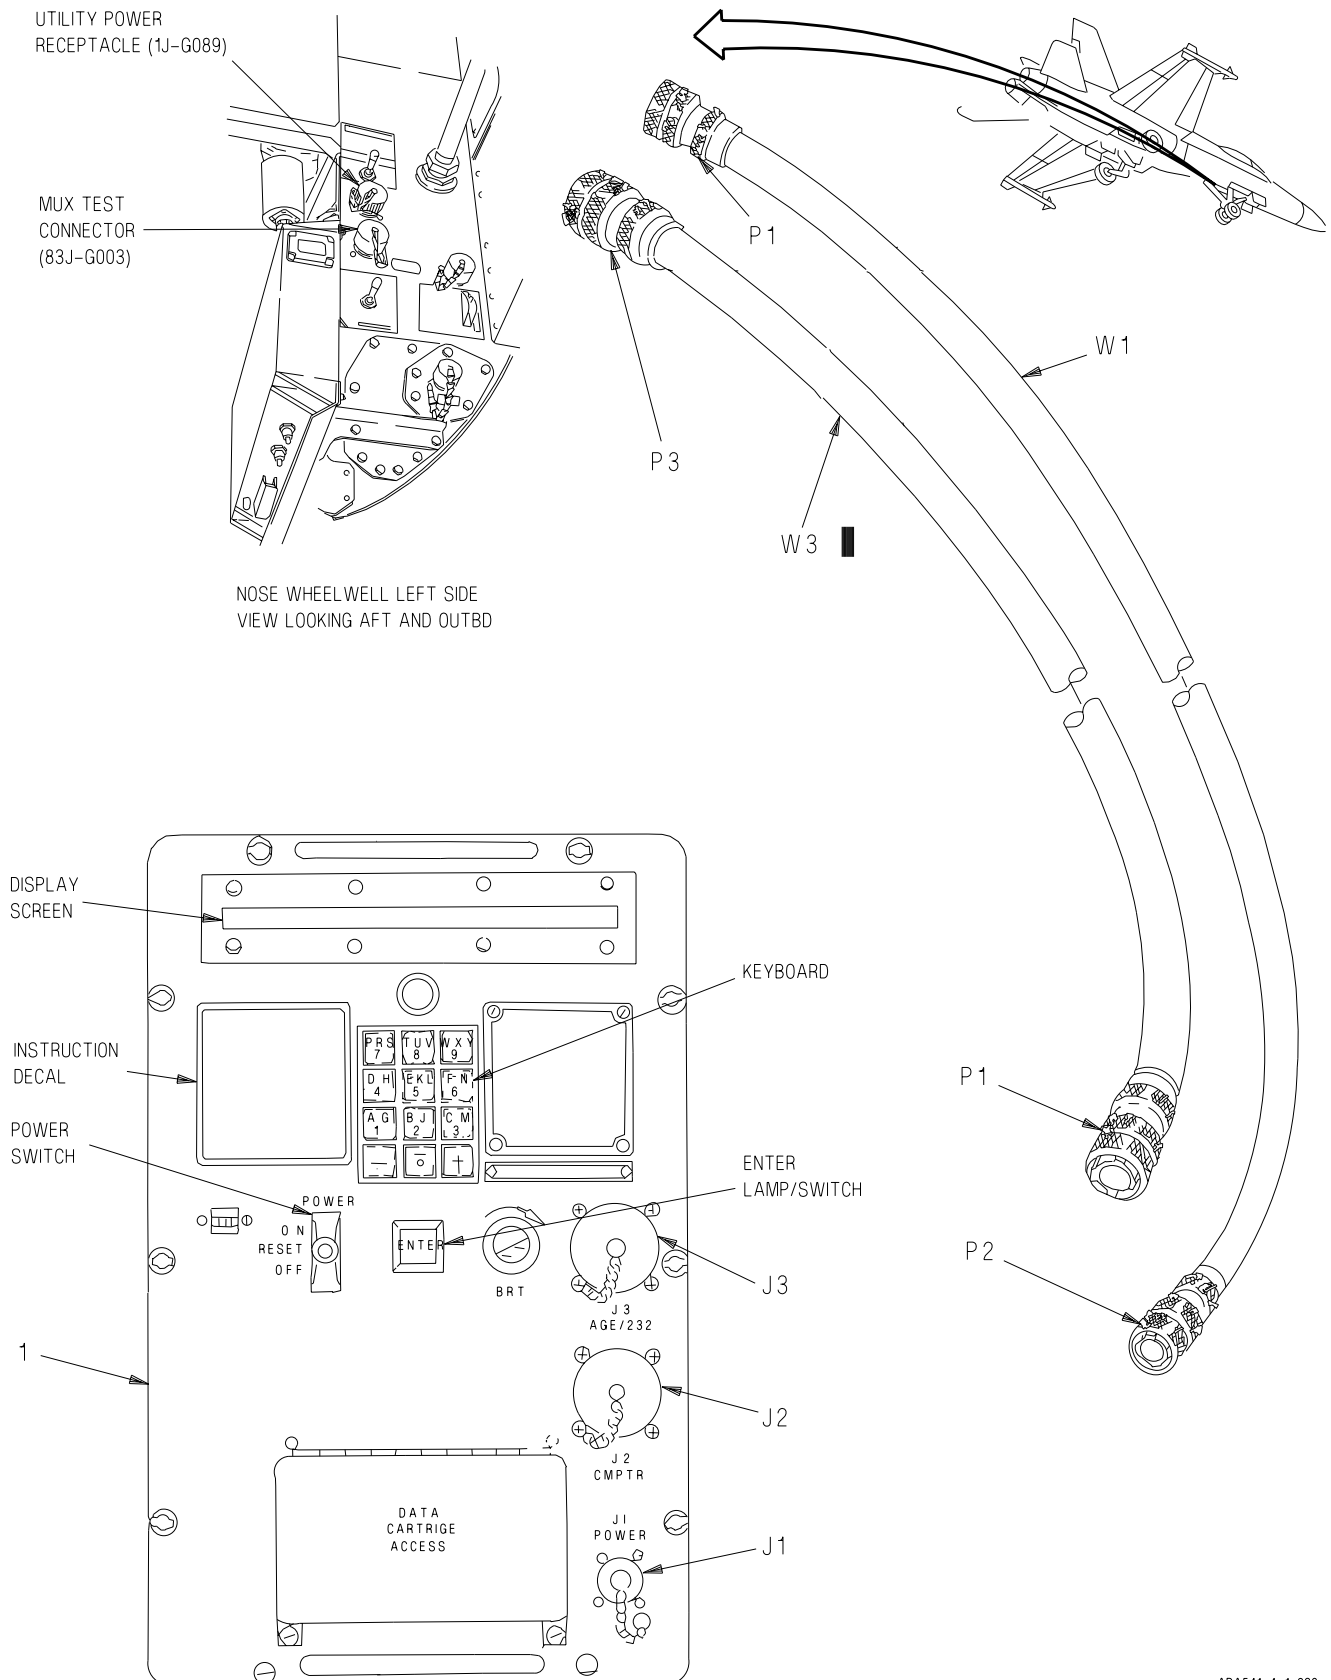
Test Equipment Hookup Locator (Sheet 1)
